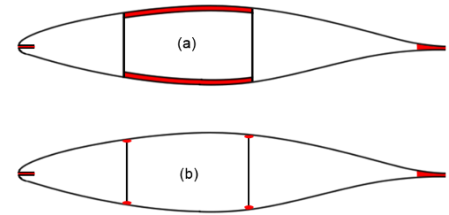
Blade airfoil bonded areas: (a) box beam, (b) shear web
